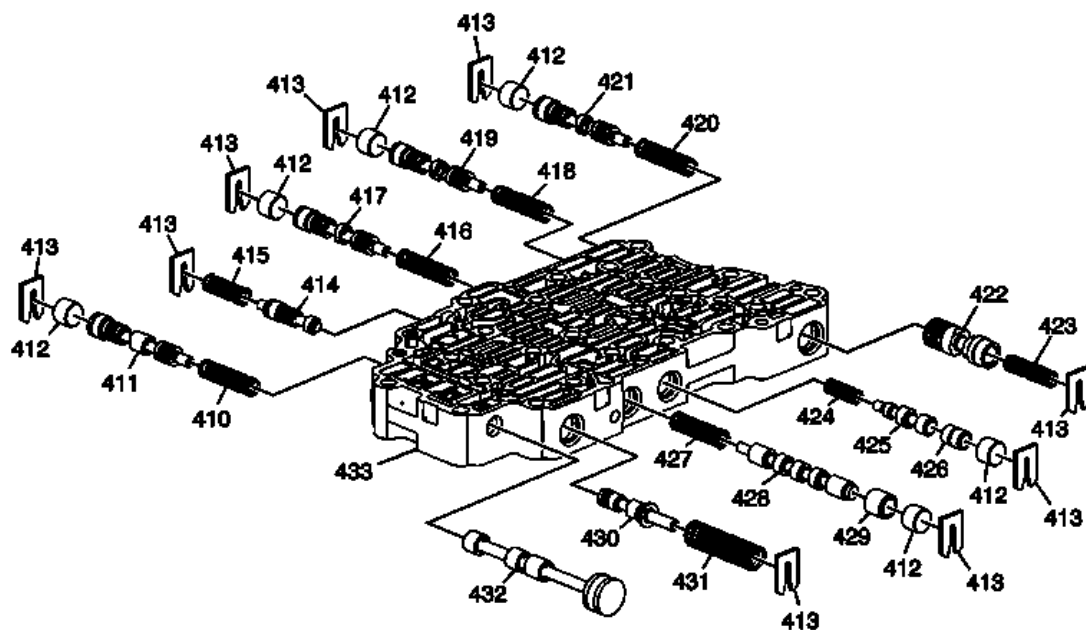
View Of Control Valve Body Assembly (2 Of 2)
